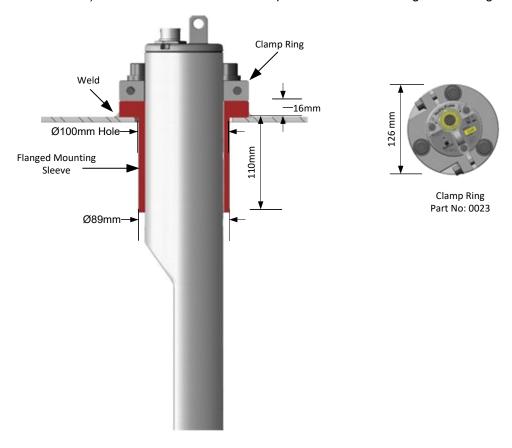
Flanged Mounting Sleeve (Part number 0024A)
